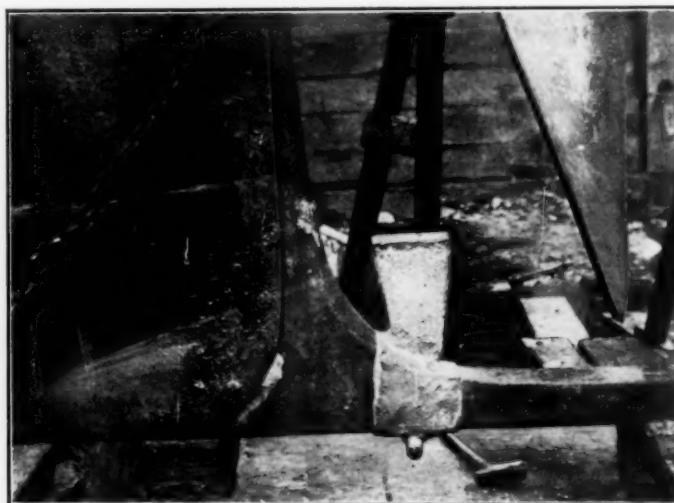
WELD ON STERN FRAME OF STEAMSHIP "CORRUNA" BELONGING TO CANADIAN LAKE NAVIGATION COMPANY. WELD EXECUTED IN MONTREAL, 1907
